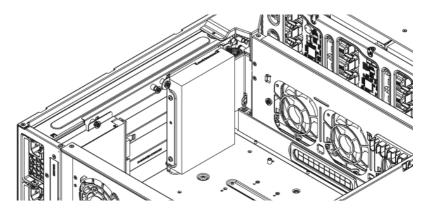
Hard Drive and Hard Drive Tray Installed in the Chassis
